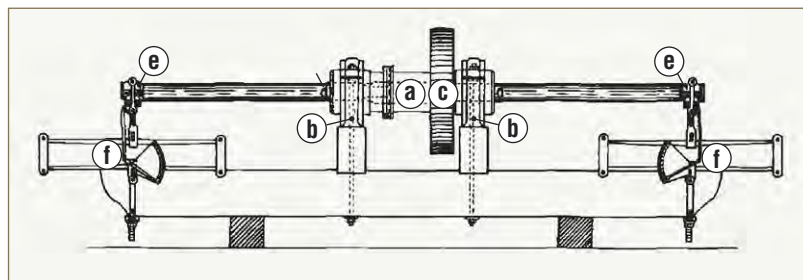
Wohler's fatigue testing machine. A spindle (a) in the center of the machine is supported by two bearing blocks (b) and rotated at approximately 15 rpm. Two axles (test specimens) were mounted to both ends of the rotating spindle and bending forces were applied to the axles through a spring mechanism (f) located at both ends of the machine. During each revolution, both axles were subjected to a fully reversed bending stress. The magnitude of the bending stress was adjusted by the tension in the spring mechanism.^[2]
